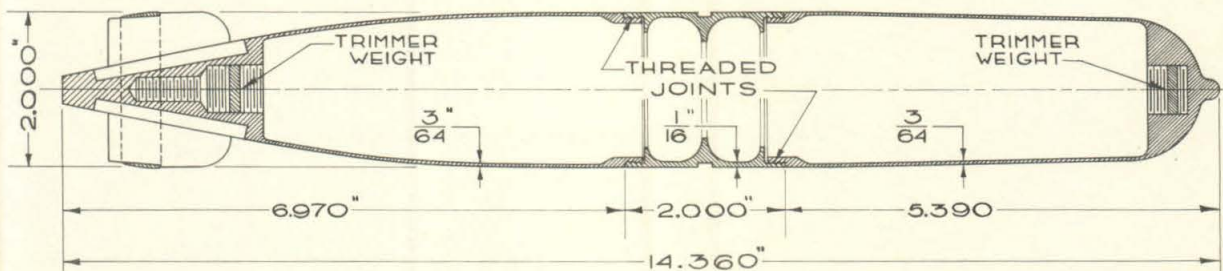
SECTIONAL VIEW - MODEL OF MK 13-6 TORPEDO WITH HEAD F
